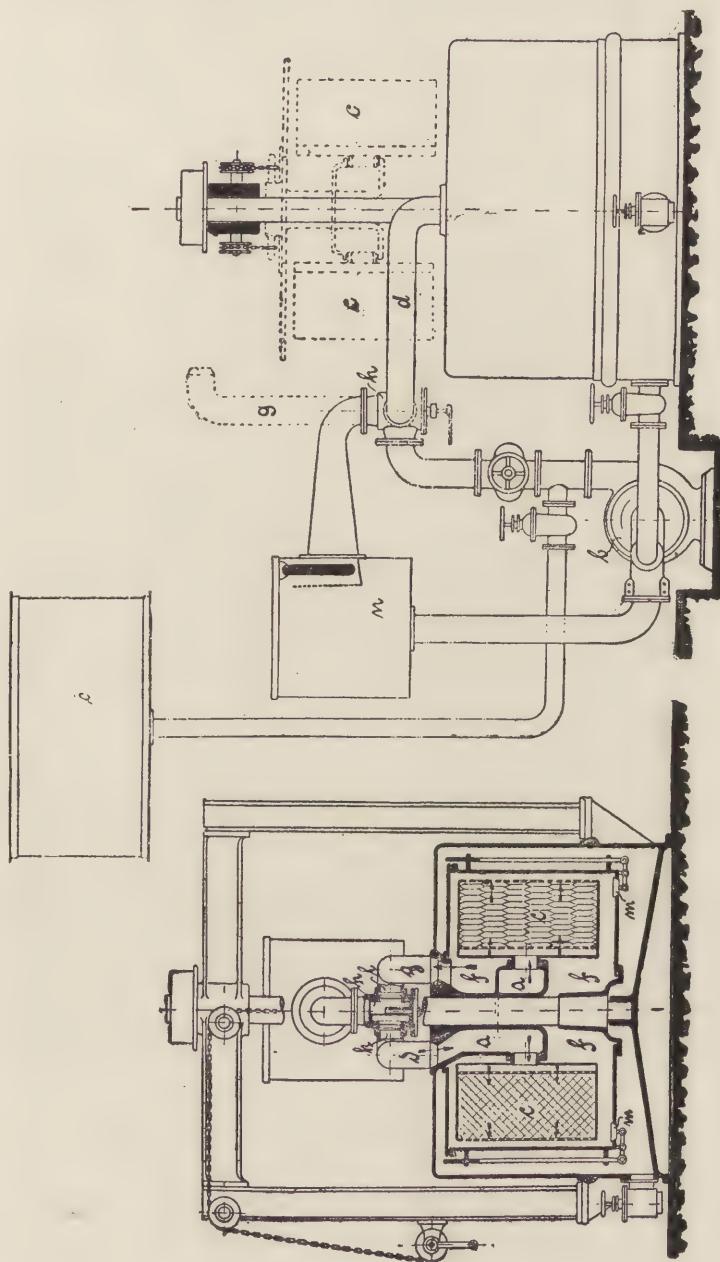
Sectional View of Cohnen Centrifugal Dyeing Machine
